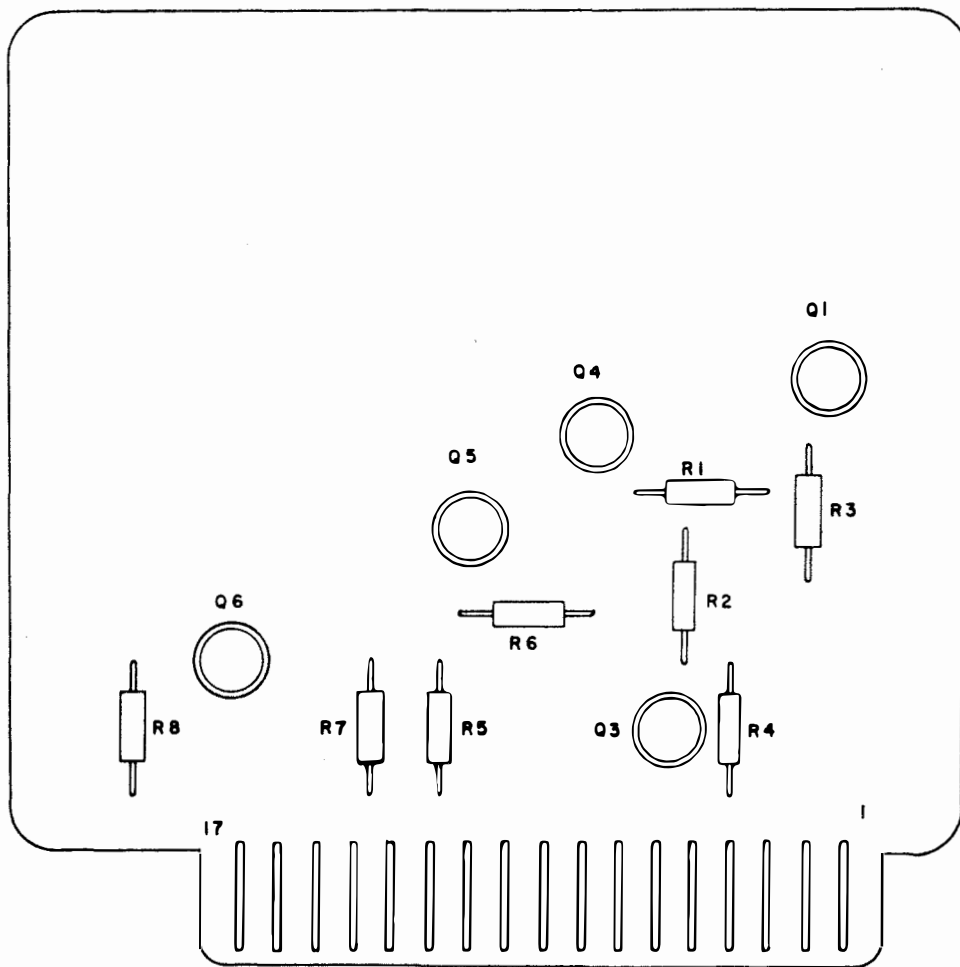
P.W. Board Assembly (A1 Timing CKT Horiz. Defl.)
